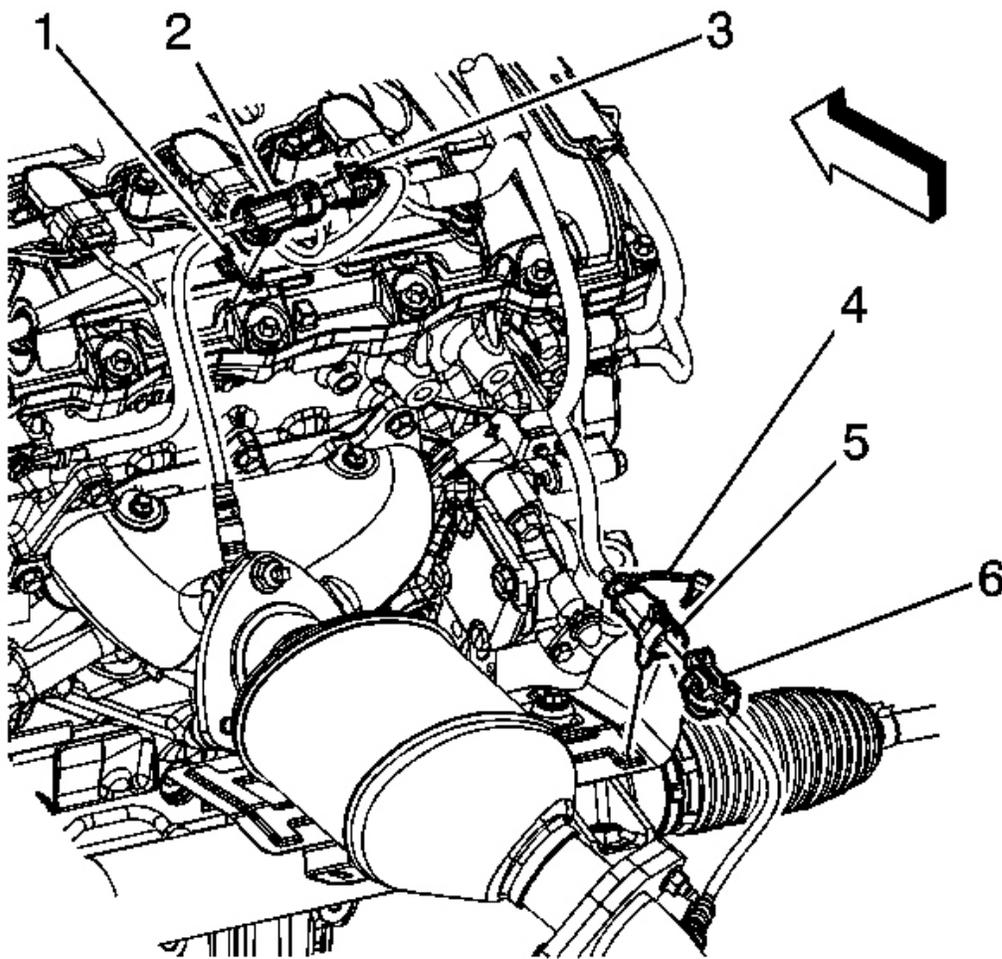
View Of Heated Oxygen Sensor Electrical Connector
